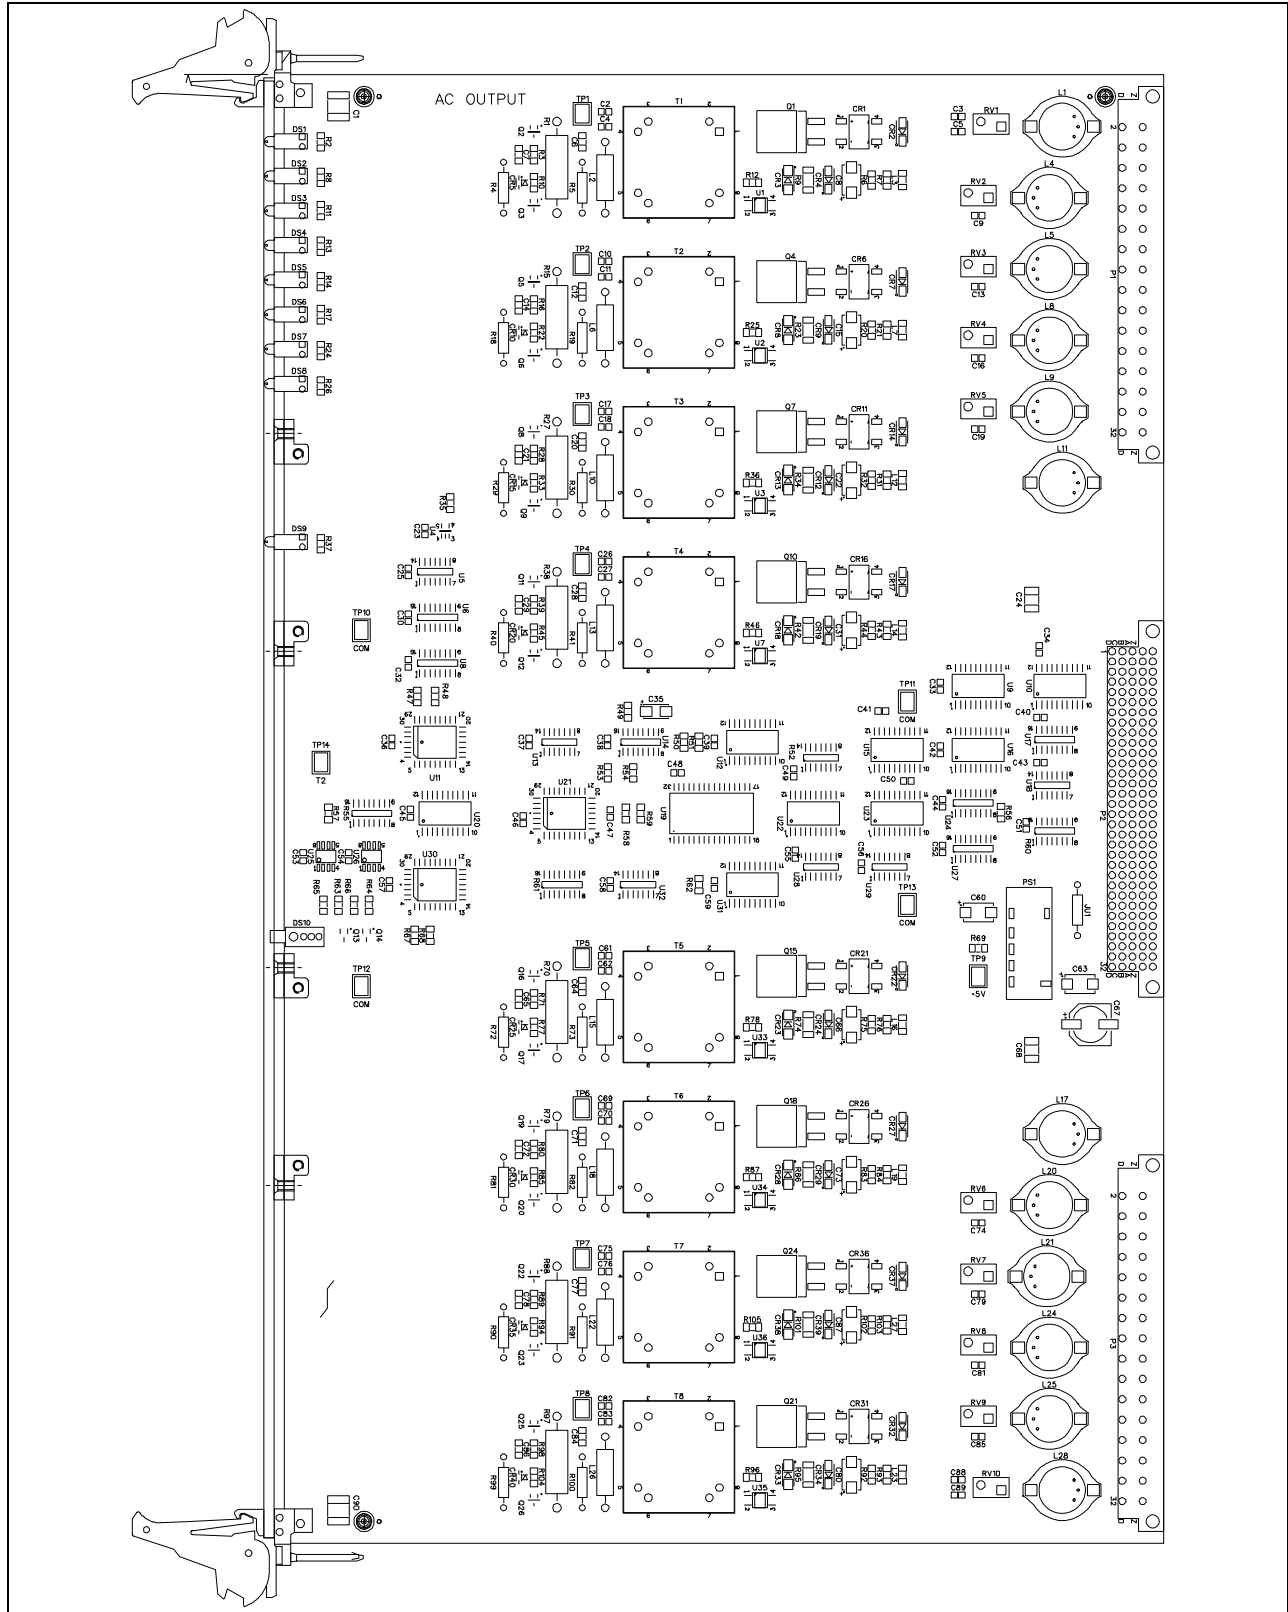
ACO Board, P/N 31166-432-01 and -02
